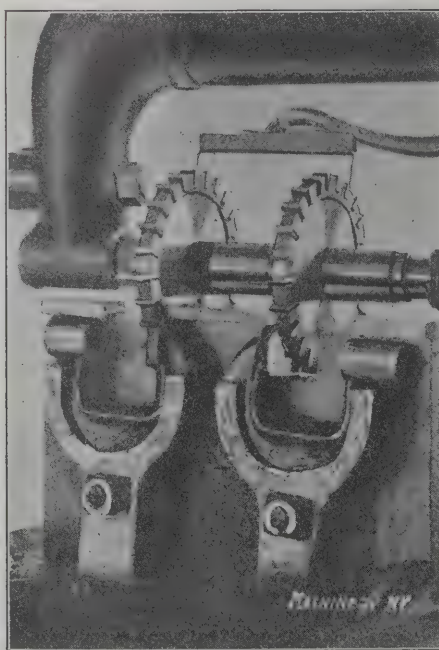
Fixture which holds Two C-clamps while Faces are being milled
